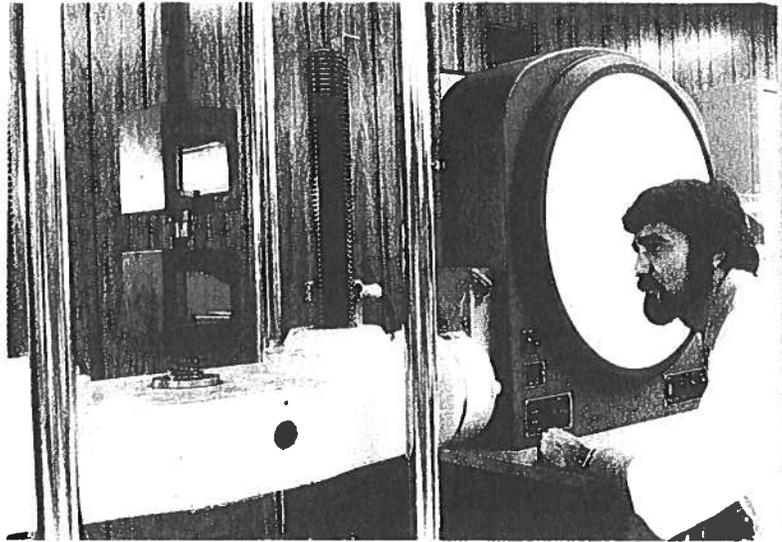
Using a standard tensile test machine, this technician subjects an aircraft engine bolt to a force of 600,000 pounds. (Fairchild Industries)
